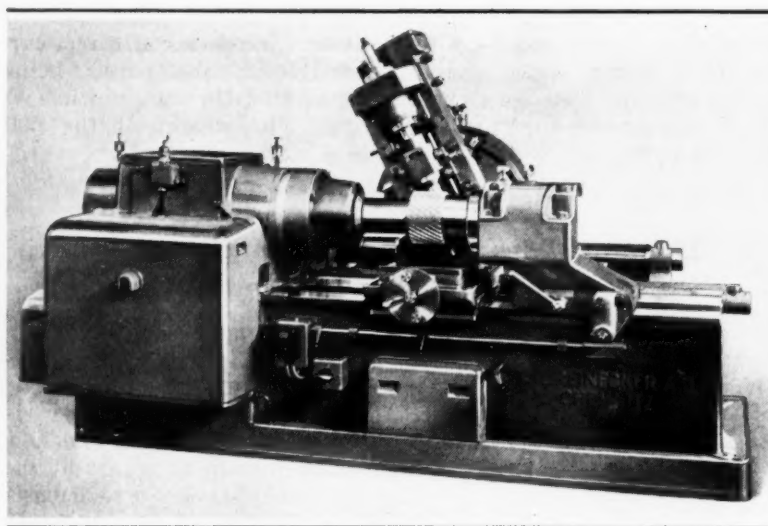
Reinecker Machine for Hobbing Straight and Spiral Splines, Spur and Helical Gears, and Single or Multiple Threads
